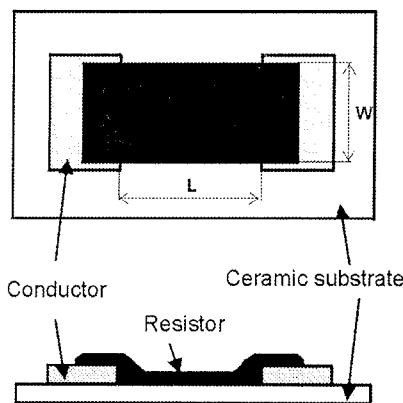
Typical geometry of a thick-film resistor, the top-view and the cross-section
